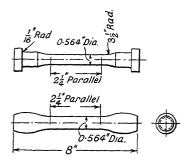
\* Forms of Test Pieces for Brittle Materials
